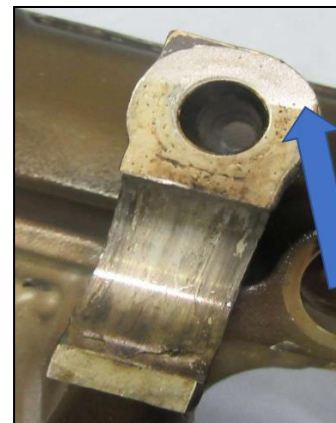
Fretting to the No. 2 camshaft bearing saddle
